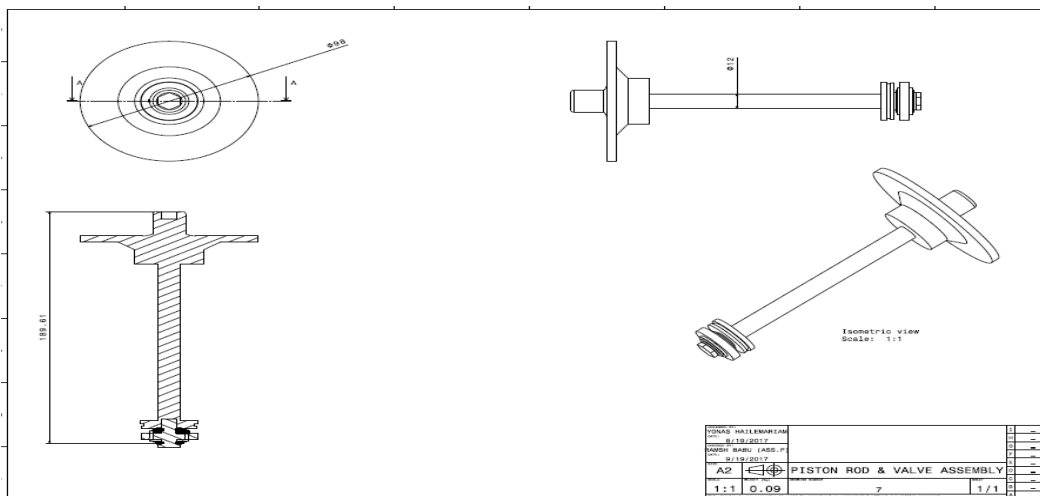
24: 2D-Drawing of piston rod and valve assembly part of shock absorber
